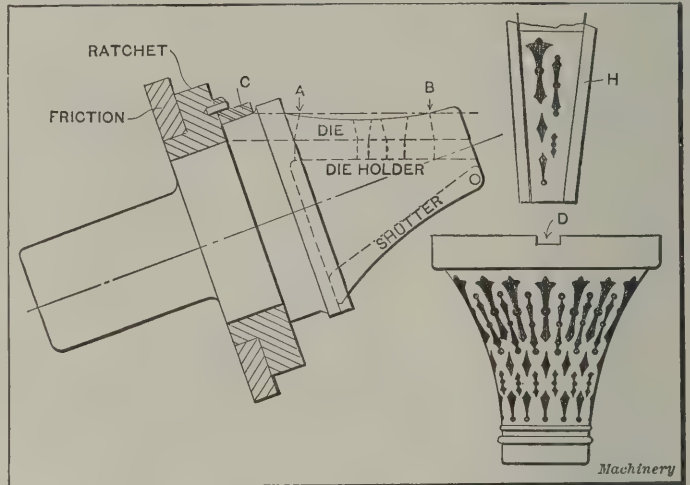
Die and Holder for Perforating Shell shown to the Right
